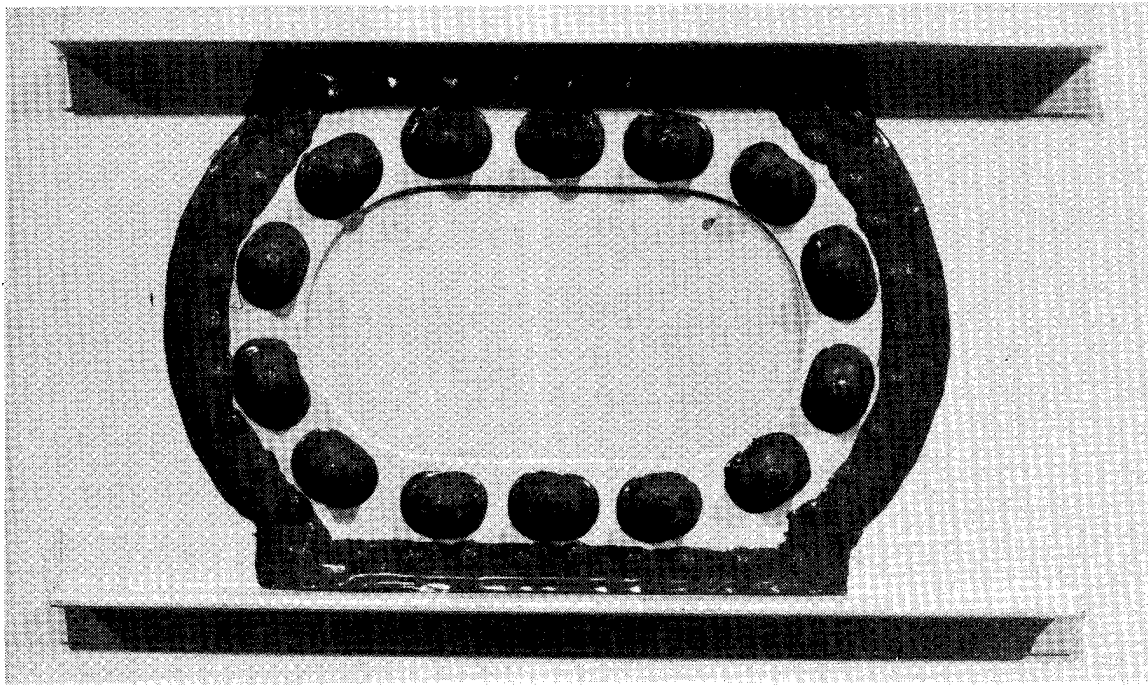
Photographs Showing Typical Access Door Panels.
